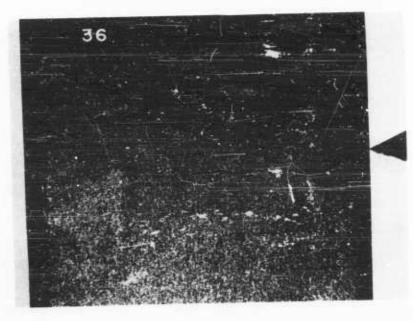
FAILURE IN SPECIMEN NO. 36
